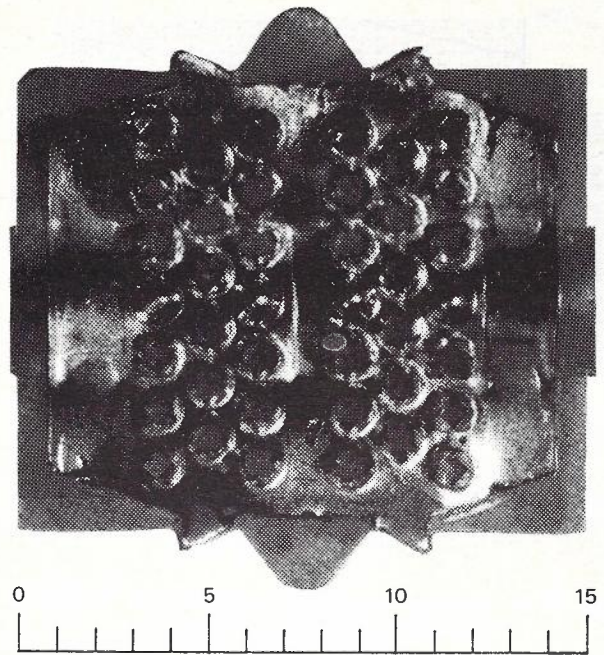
H2562-1 Connector with Side Walls Lowered
